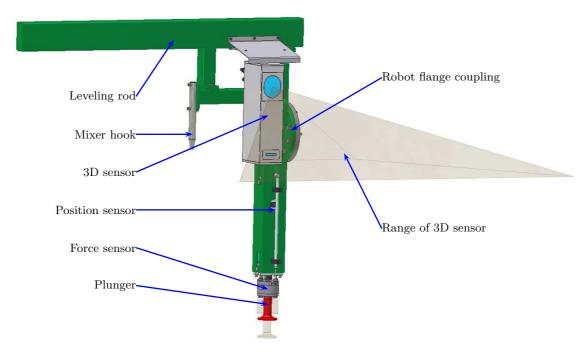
Developed multi-tool for the flexible manufacturing cell (Drawing: Janke GmbH)
